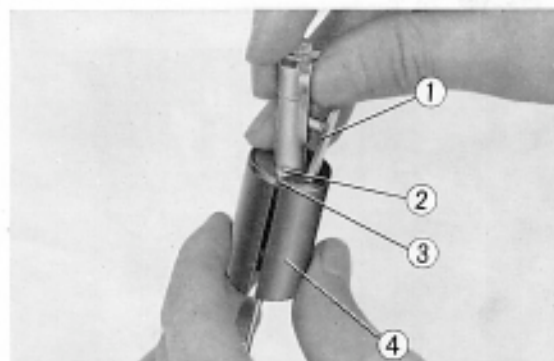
① Valve plate ② 3 mm screw ③ Spring washer ④ Throttle valve
